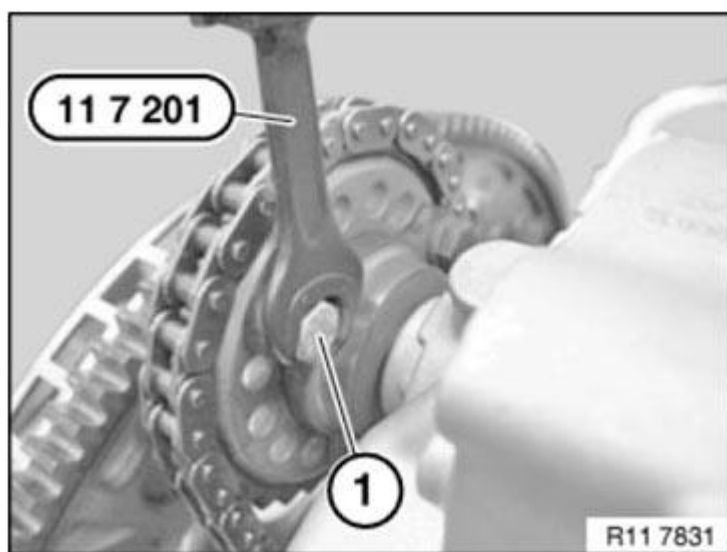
Removing Nuts Using Special Tool 11 7 201
